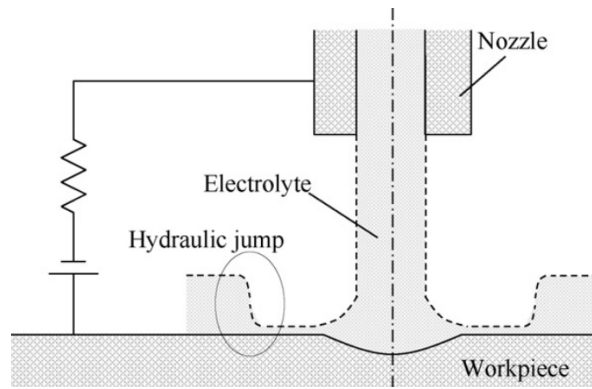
Schematic illustration of electrolyte jet machining, reprinted from [24].
